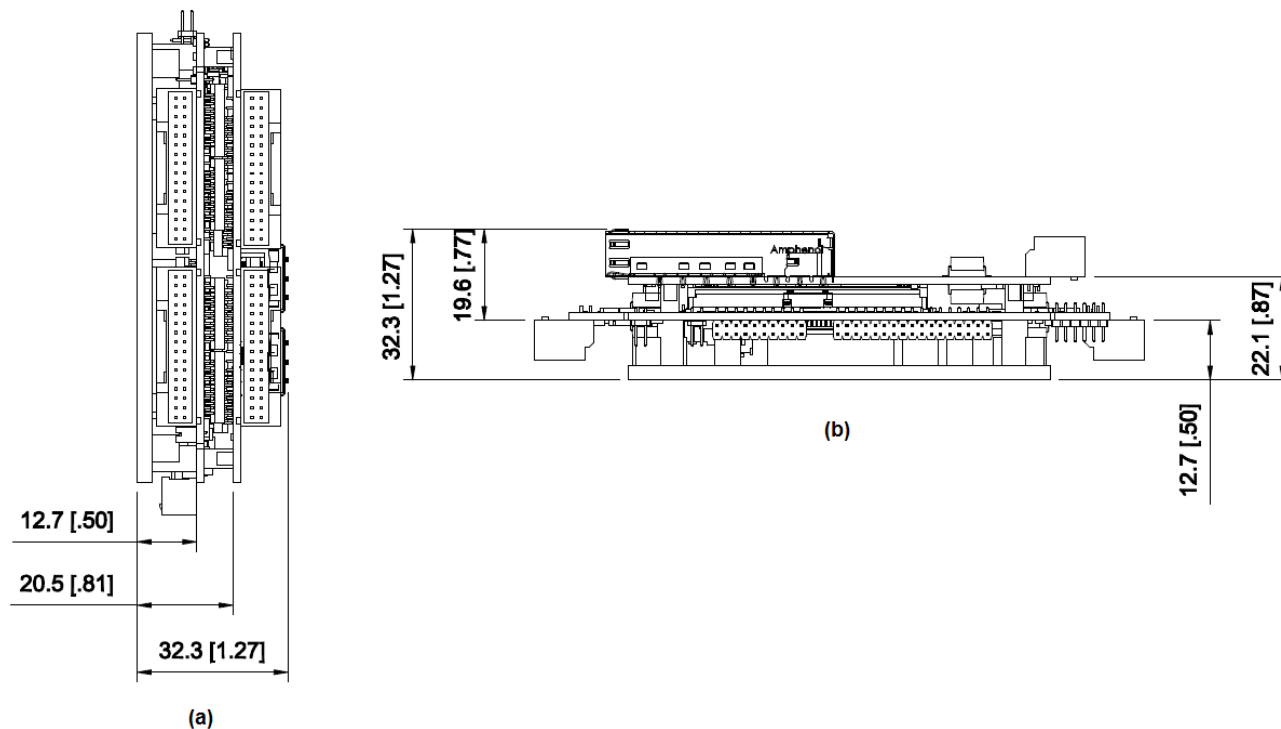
Main Board and Daughter Board with Heat Spreader Installed
